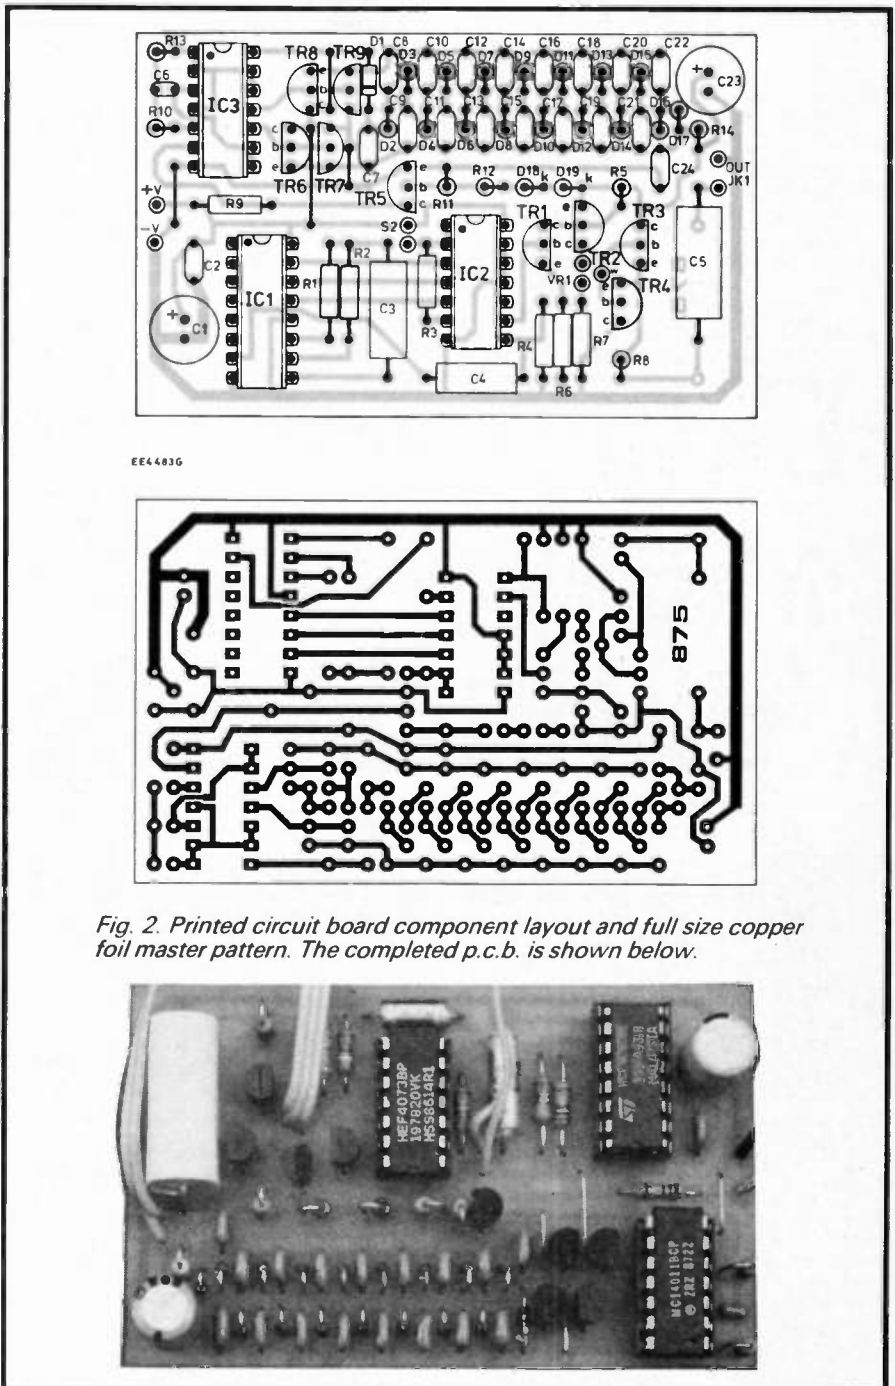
Printed circuit board component layout and full size copper foil master pattern. The completed p.c.b. is shown below.
